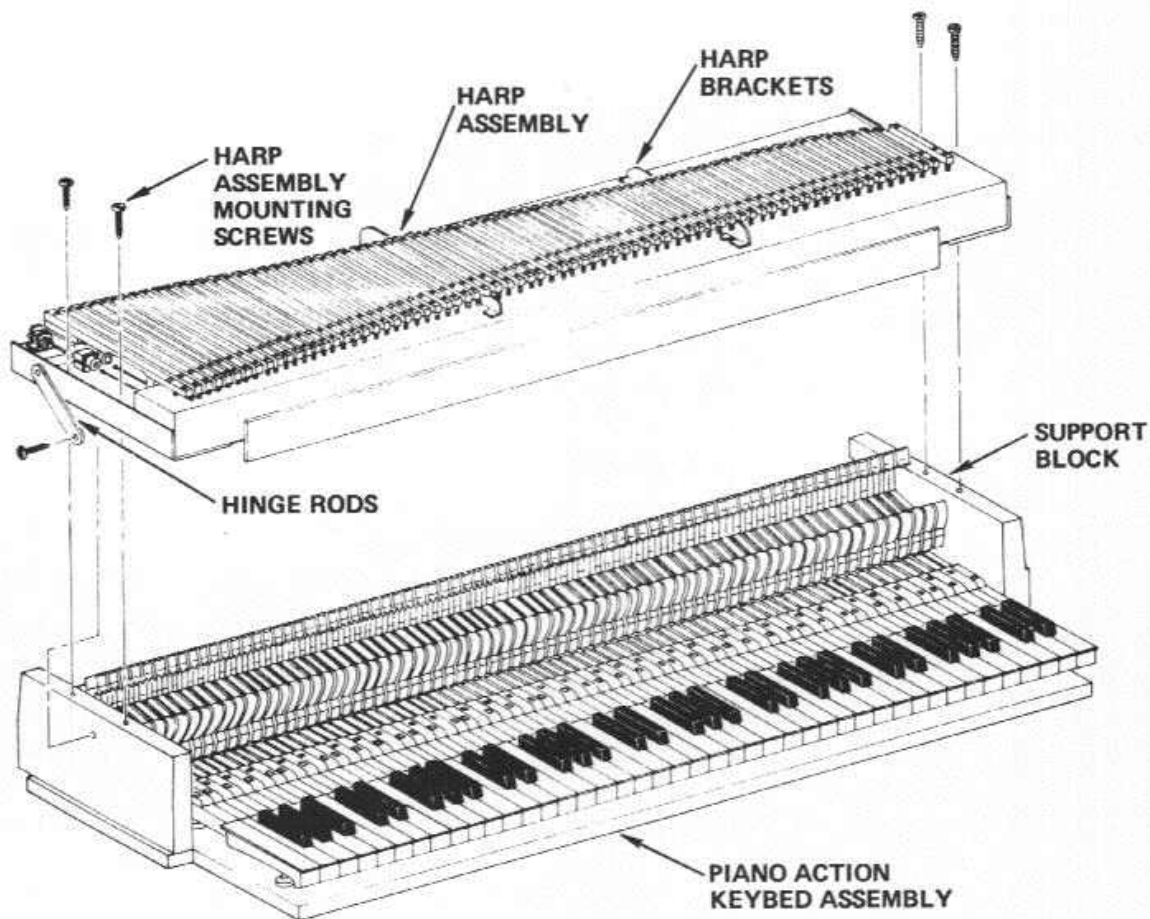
RHODES Early Design Harp/Action Assembly — Exploded View
